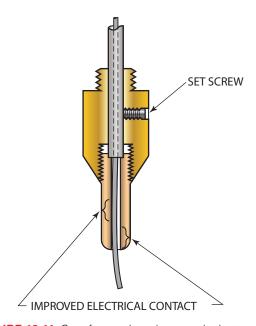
Cast forces the wire to make better electrical contact with the tube.
